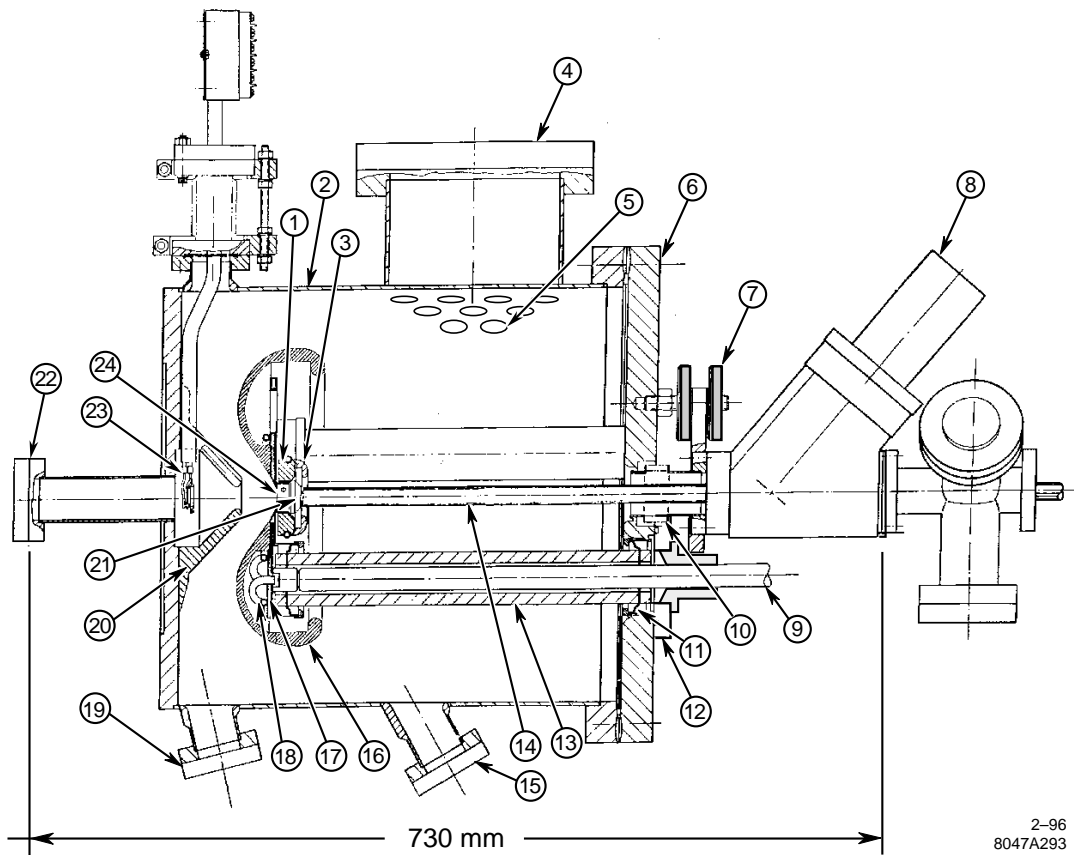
Cross section of inverted gun: (1) docking mechanism and puck holder, (2) gun body, (3) shielding rings, (4) ion pump port, (5) pumping holes, (6) end flange, (7) jacks, (8) access valve, (9) high-voltage cable, (10) bellows, (11) Kovar weld ring, (12) gas seal flange, (13) ceramic insulator, (14) transporter rod (only in place while changing cathode), (15) Viewing port, (16) cathode electrode, (17) support plate, (18) gas tubes, (19) illumination window, (20) anode electrode, (21) puck, (22) exit port to beam line, (23) cesiator, (24) photocathode.
